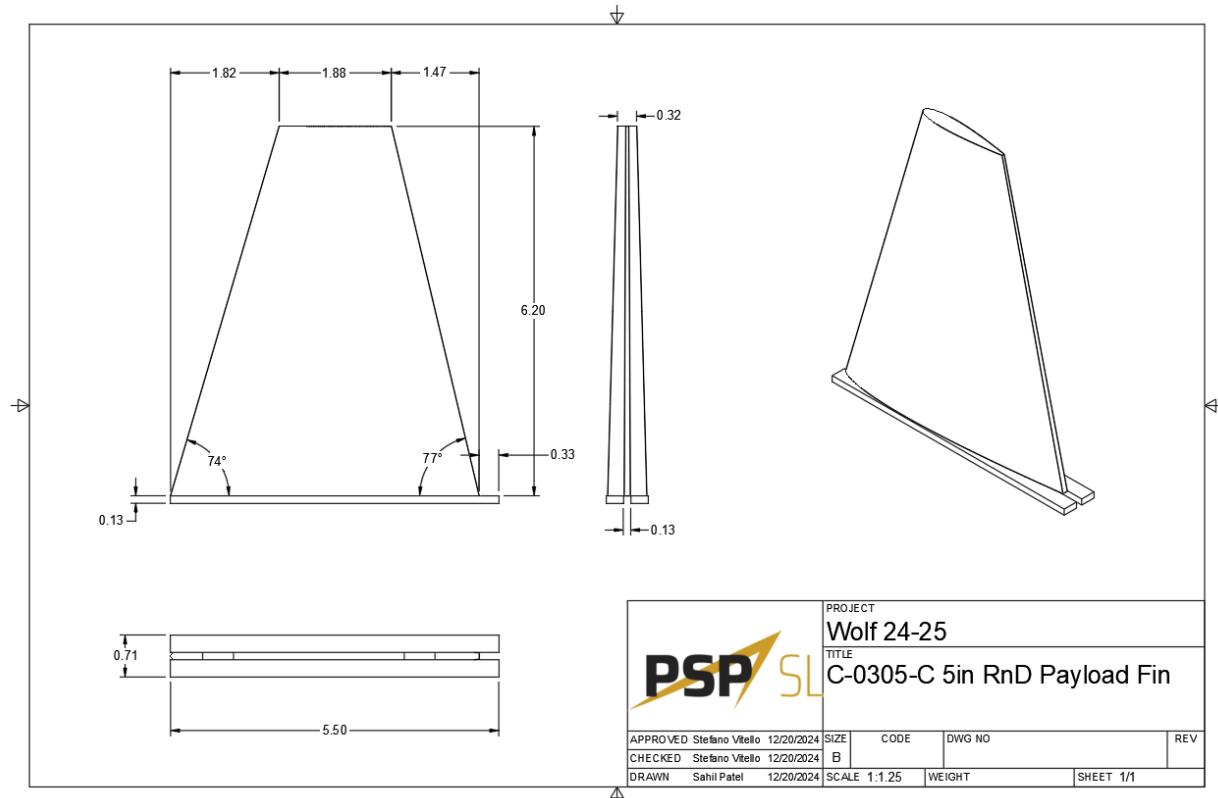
5in Fin Technical Drawing
